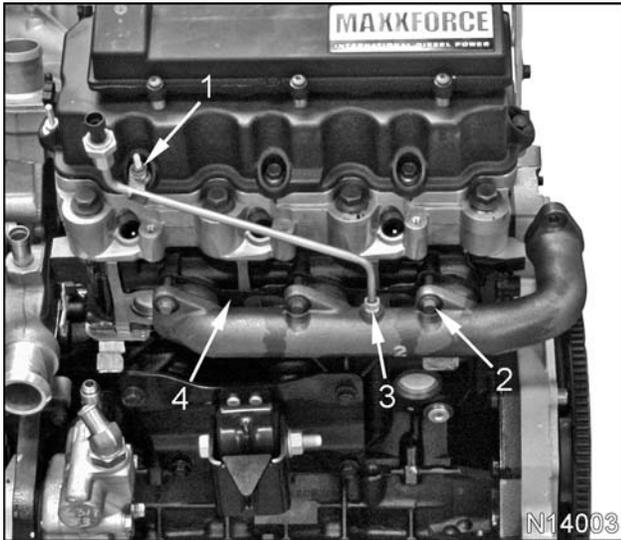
Left exhaust manifold and Exhaust Back Pressure (EBP) tube
